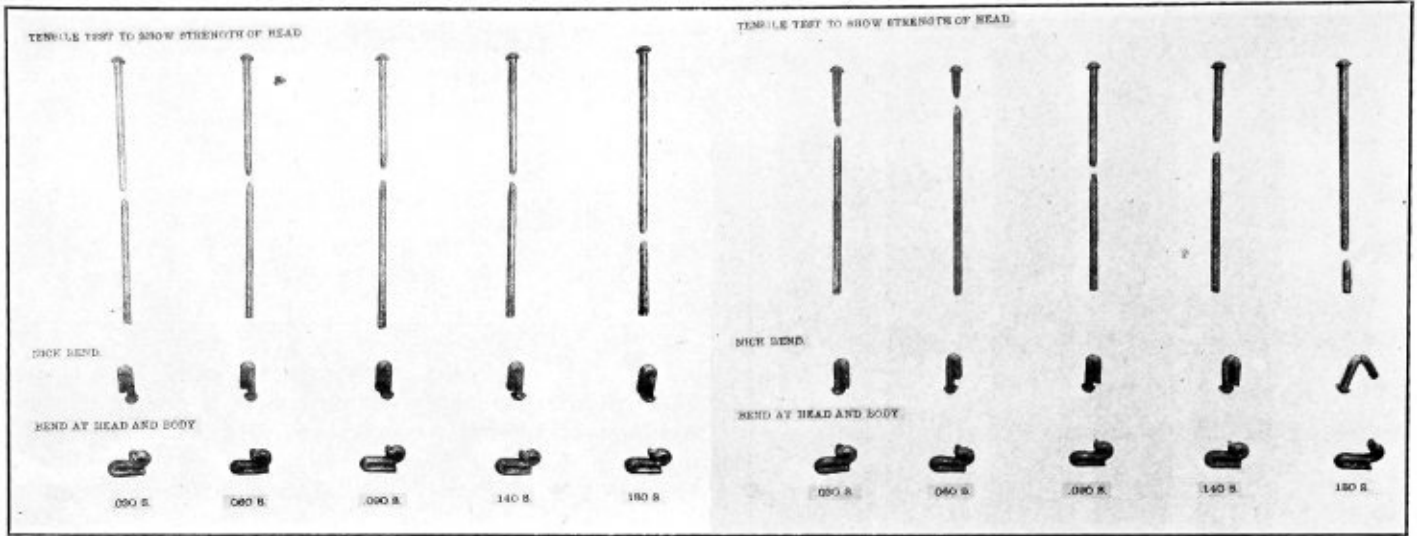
$\frac{3}{4}$ -Inch Rivets, 0.09 Carbon, Tested in the Ordinary Cold Condition
